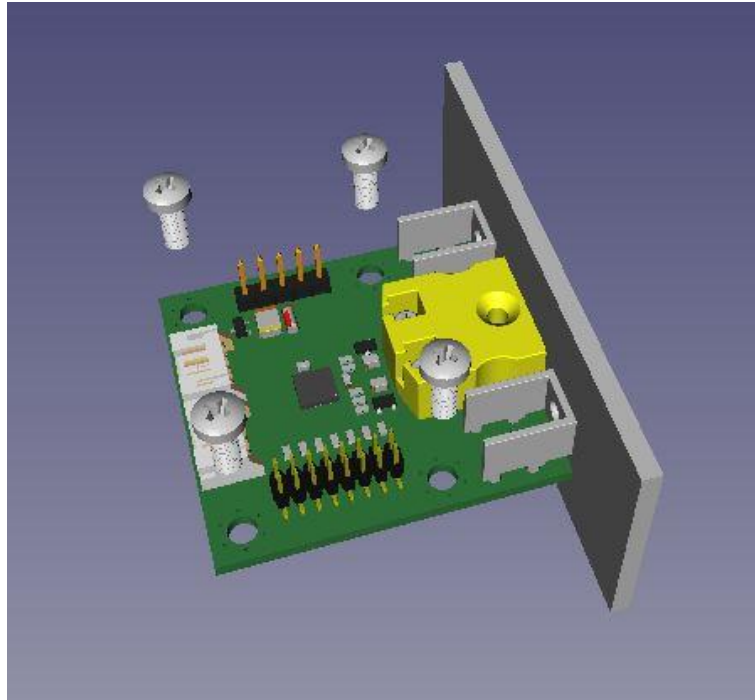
Attach the I2C-TC9600XP PCB to the bottom of the enclosure.
